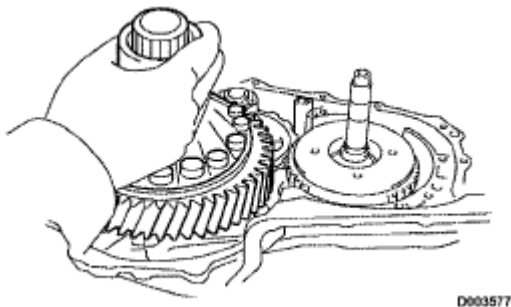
Installing Differential Gear Assembly To Transaxle Case
